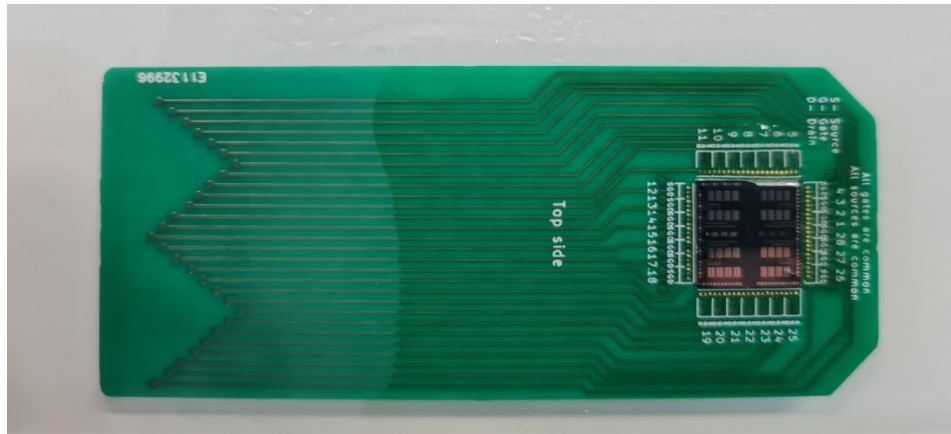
Image of a PCB with a CNT-FET device after wire bonding and passivation process.
